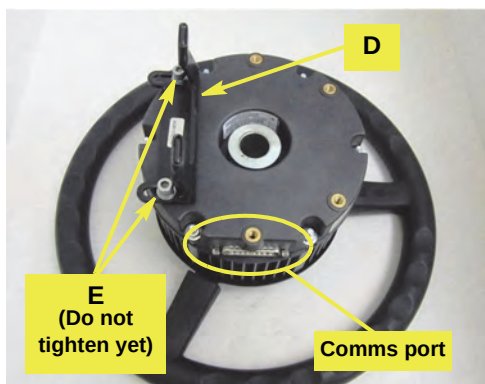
i: 21nn-71nn models - Anti-rotation bracket installed. When the wheel assembly is installed, the a/r bracket will be to the front of the steering column, the comms port to the right.
